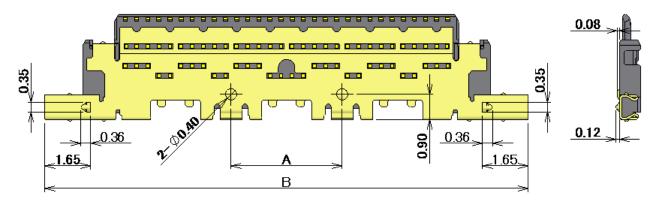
The SHELL bottom side of PLUG HSG ASS'Y
